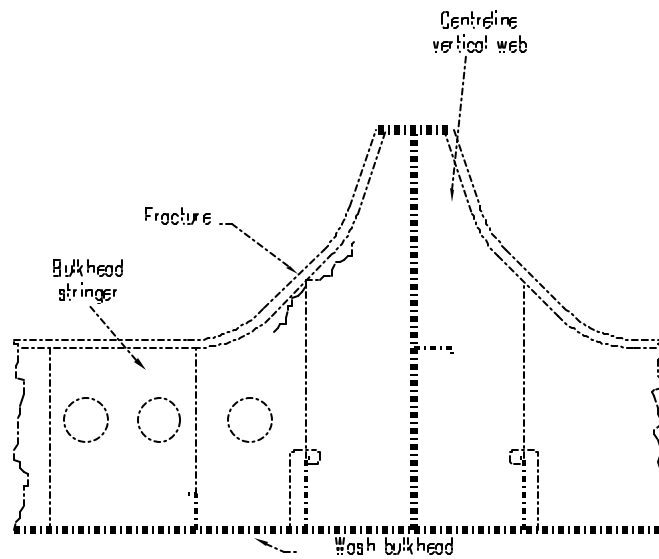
Fractured centre girder at intersection with the bottom transverse.
